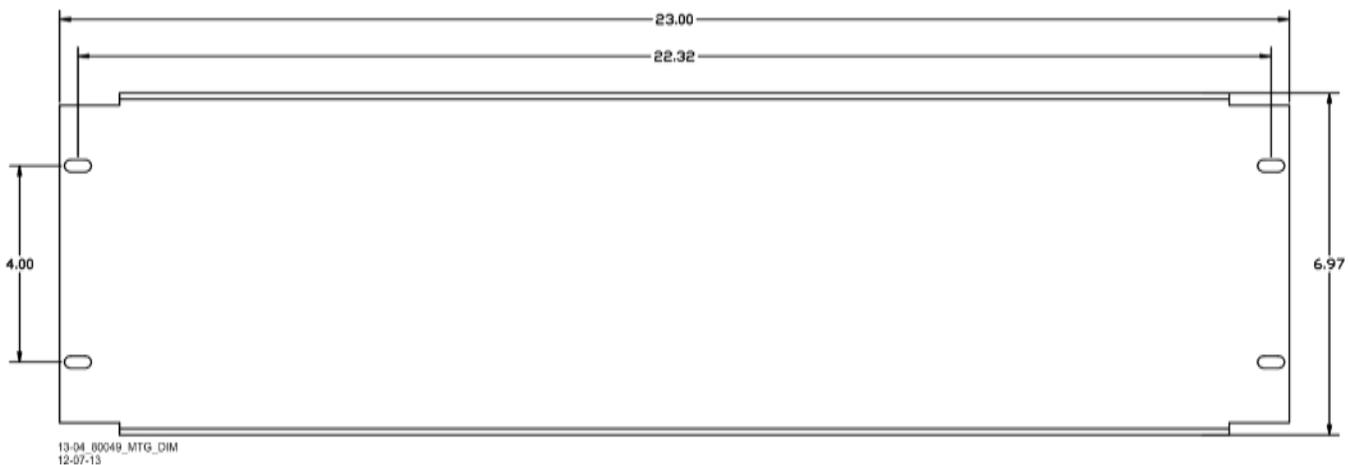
DC Shunting Enhancer Panel Mounting Dimensions
